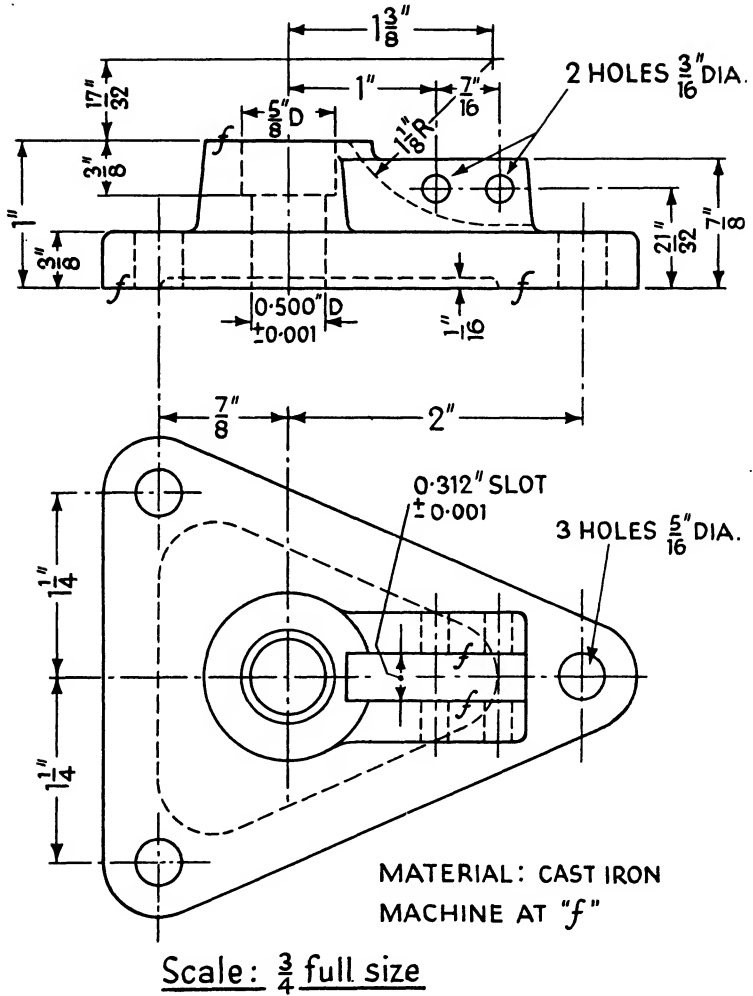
WORKING DRAWING OF COMPONENT TO BE MADE
